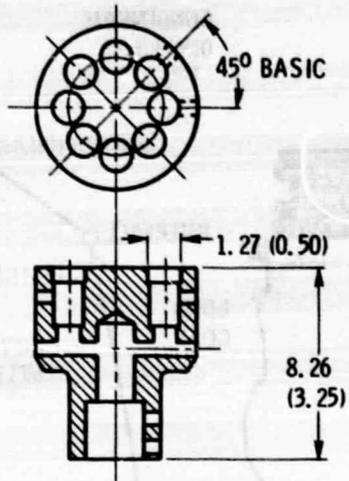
Multiple-specimen test fixture. (Dimensions are in cm (in. ).)
